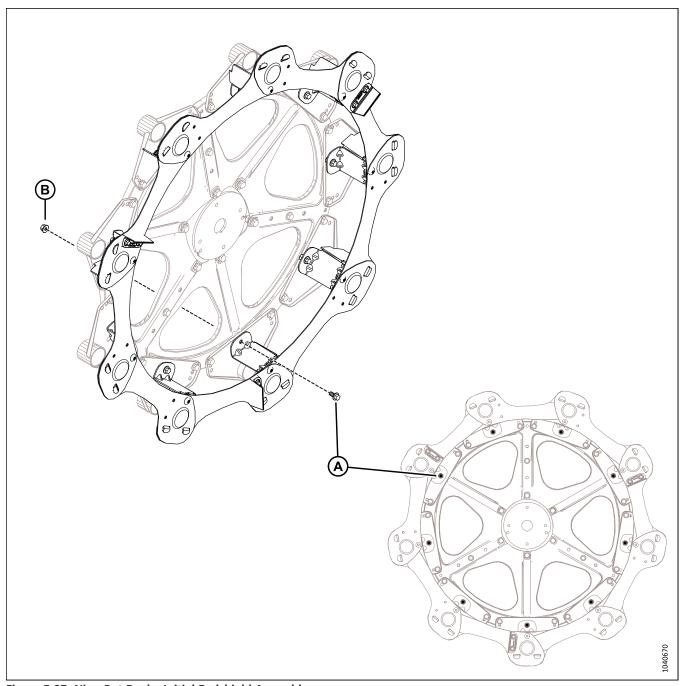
Nine-Bat Reel – Initial Endshield Assembly
